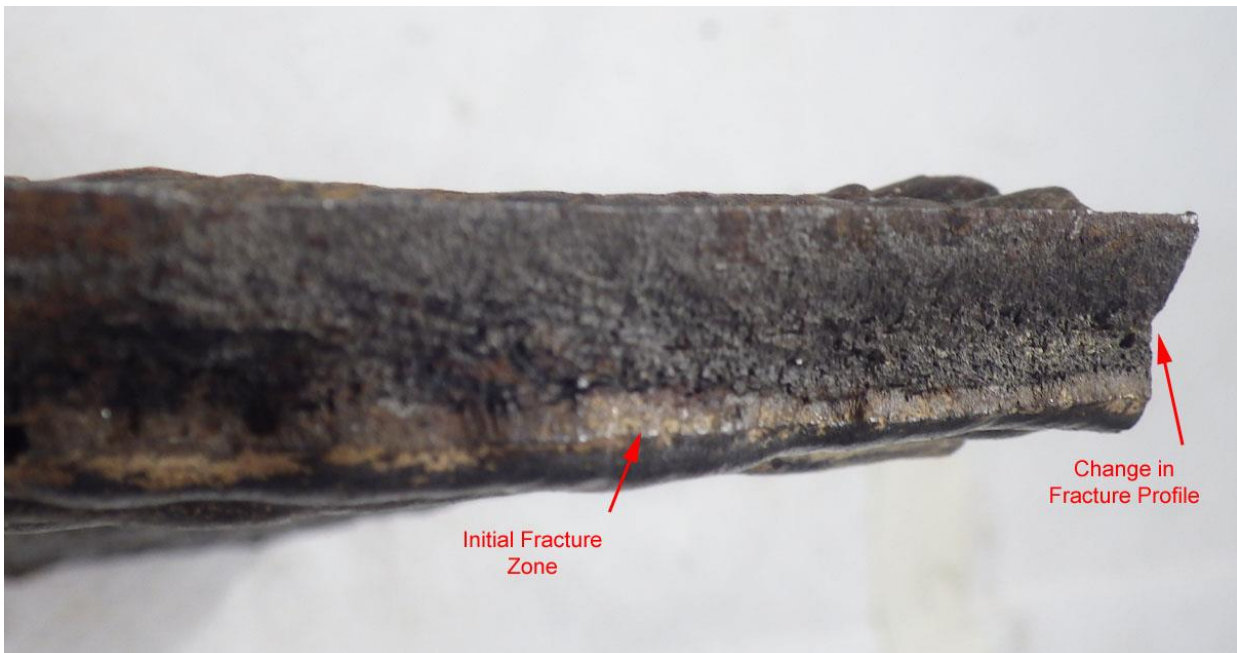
Photograph showing the fracture surface illustrating different fracture modes
